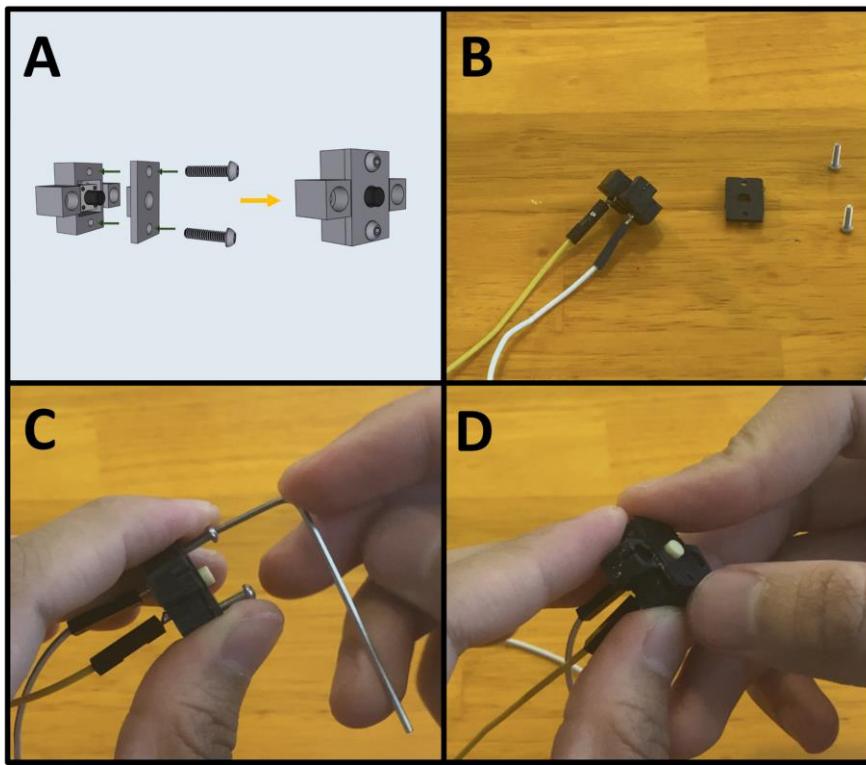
d: The procedure for finishing the Purge Button Assembly.
